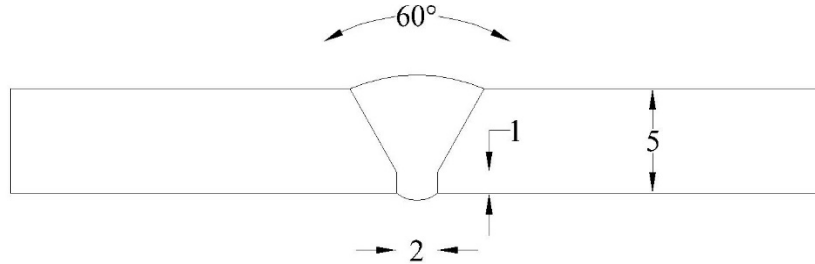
Investigated weld section – dimensions are in [mm]
